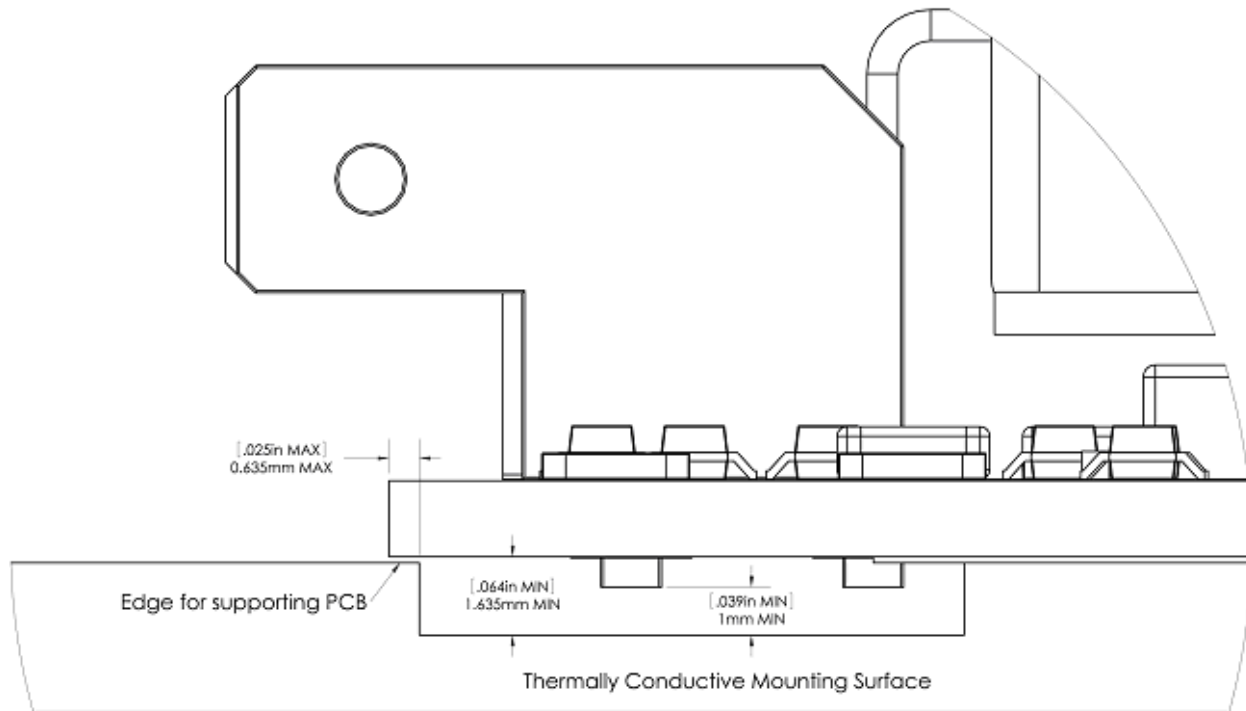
DPFlex PCB edge dimensions and tolerances
